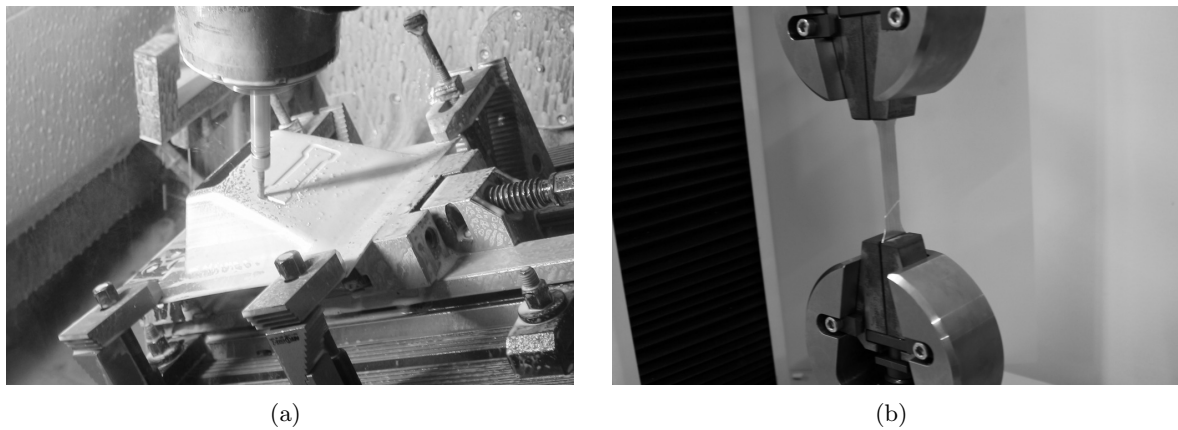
Tensile tests of aluminium specimens at different strain strength states: (a) specimen cut at the smaller slope wall (b) tensile test with the specimen cut from the higher slope wall
